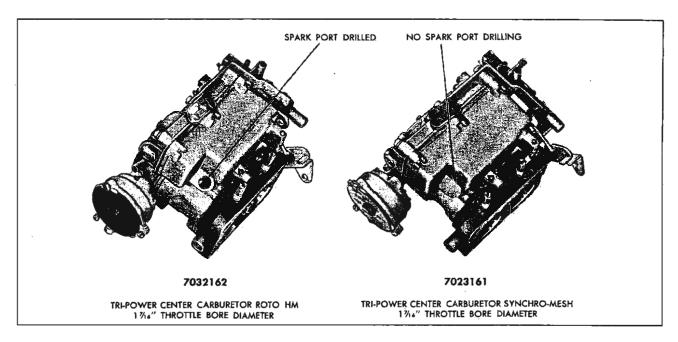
Comparison of Carburetors 7023161 and 7023162 Showing Spark Port Drilling. Neither is Equipped with Throttle Return Check.
